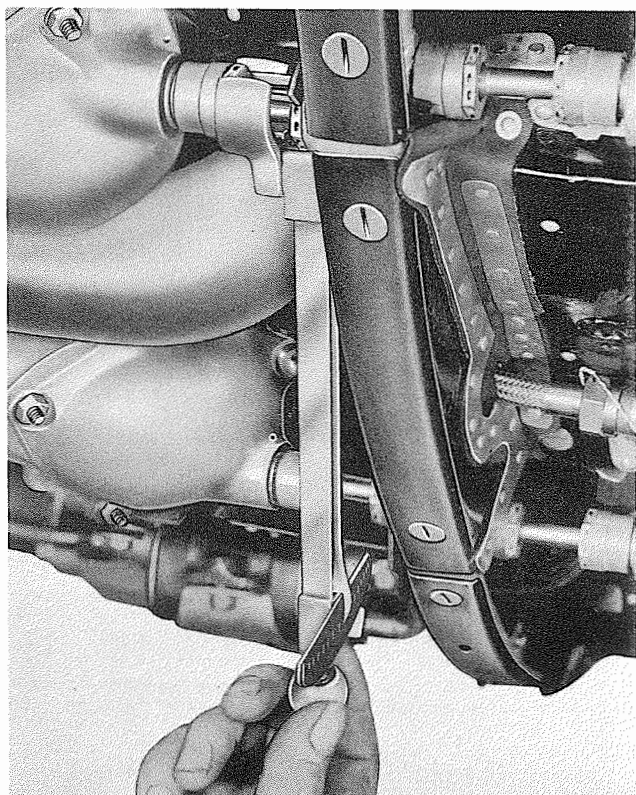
Torquing Rocker Box to Drain Manifold Tube Gland Nut
